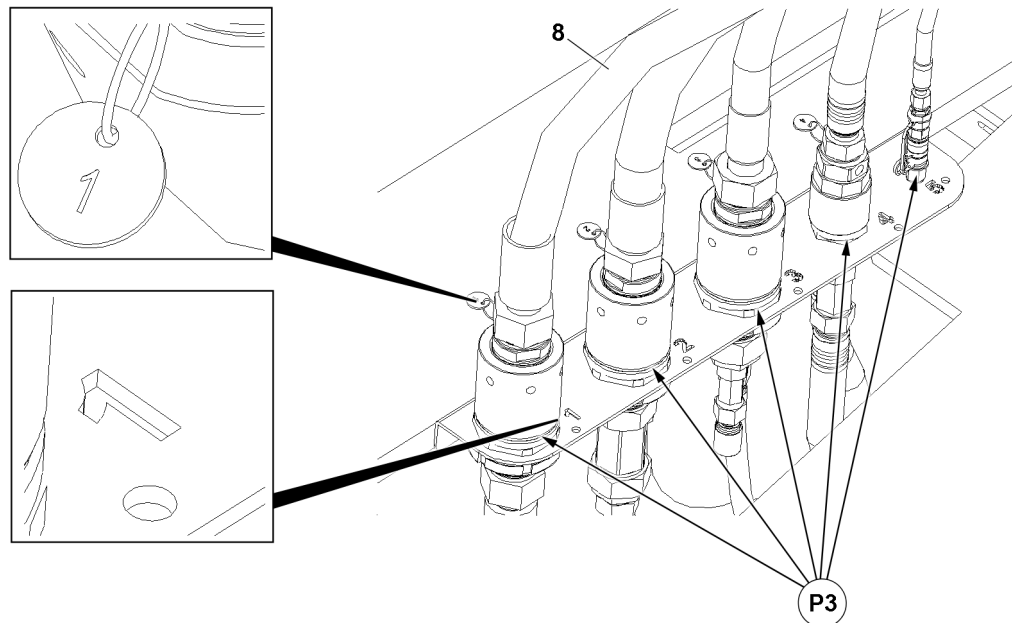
Assembling the ballast trailer guide on the ballast trailer – Hydraulic line marking
